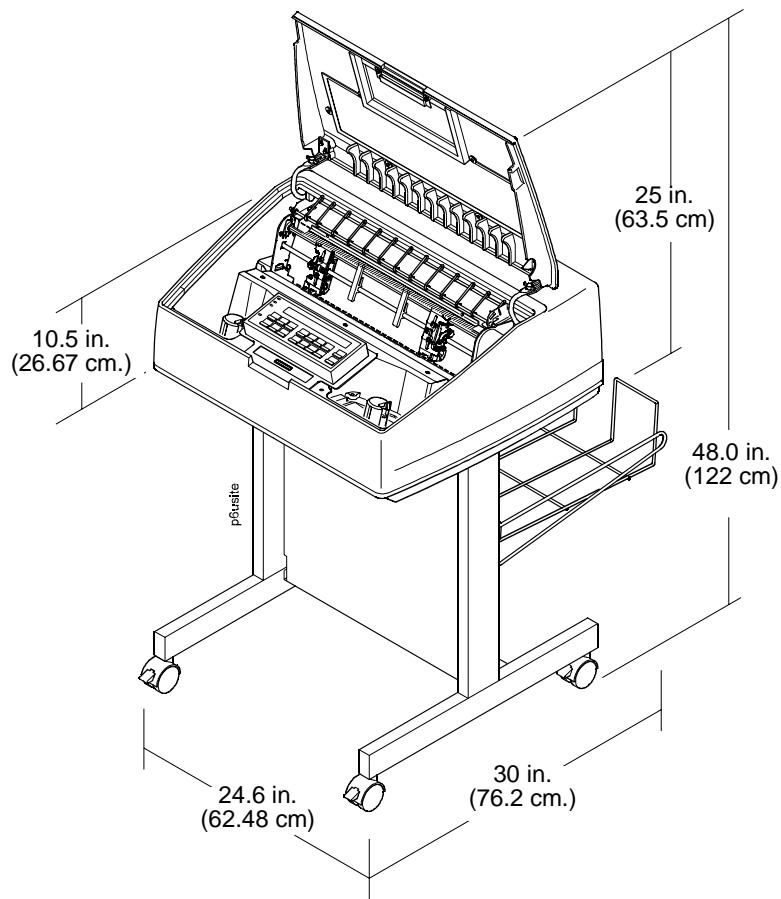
Exploded View Of Pedestal Model Printer Dimensions
